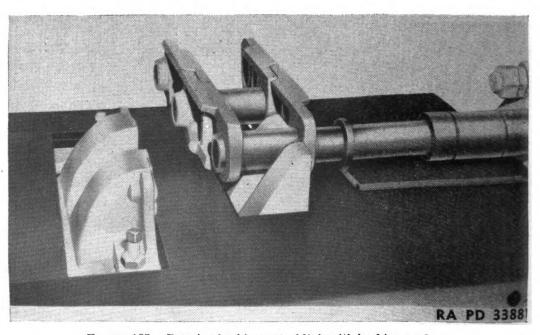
Pressing bushing out of link with bushing pusher.
